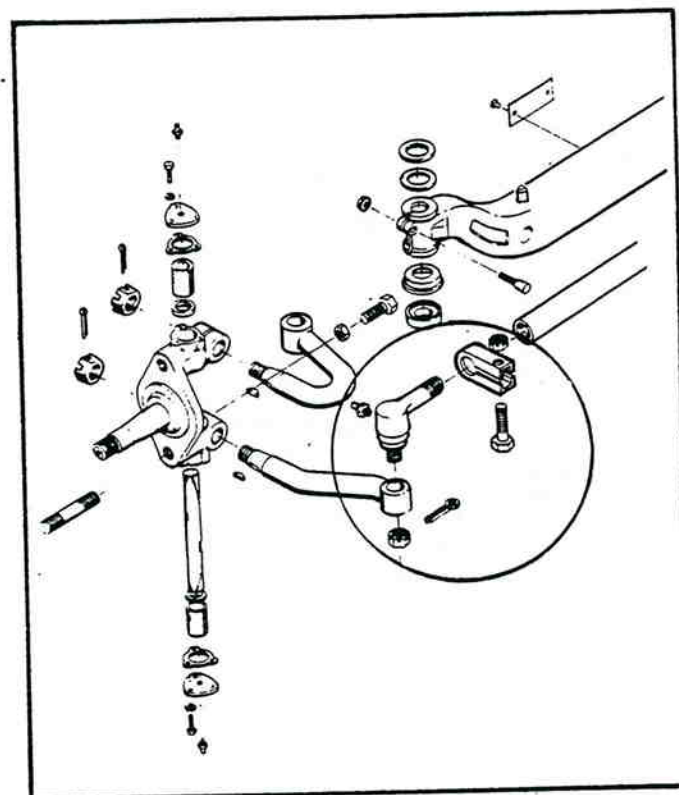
Tie Rod End (Later MC-9 Coaches).
